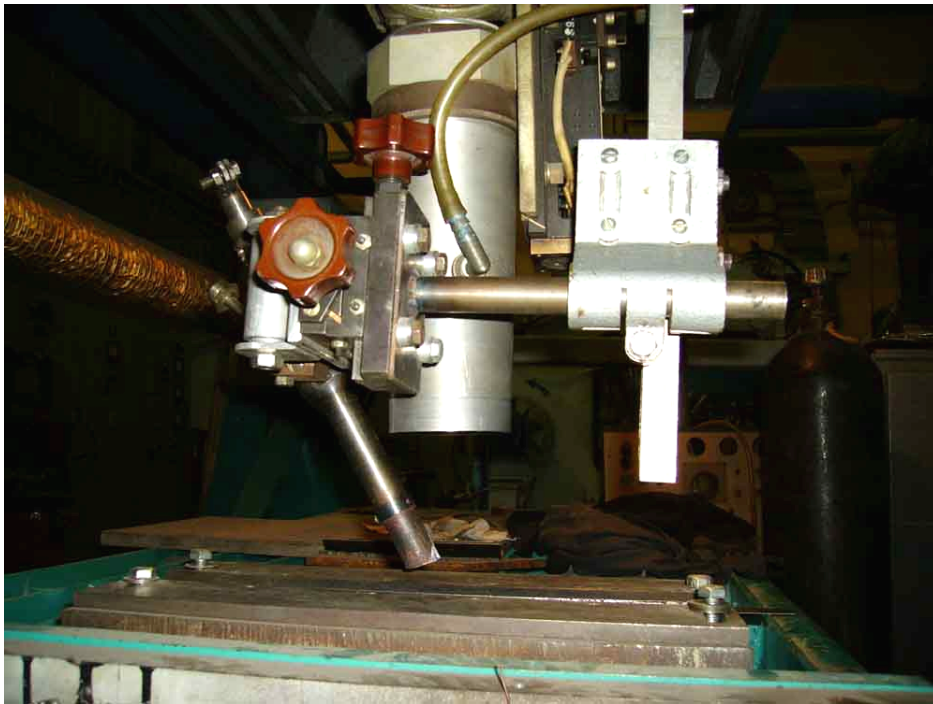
Testing bench for laser welding of the aluminum-based composite materials
